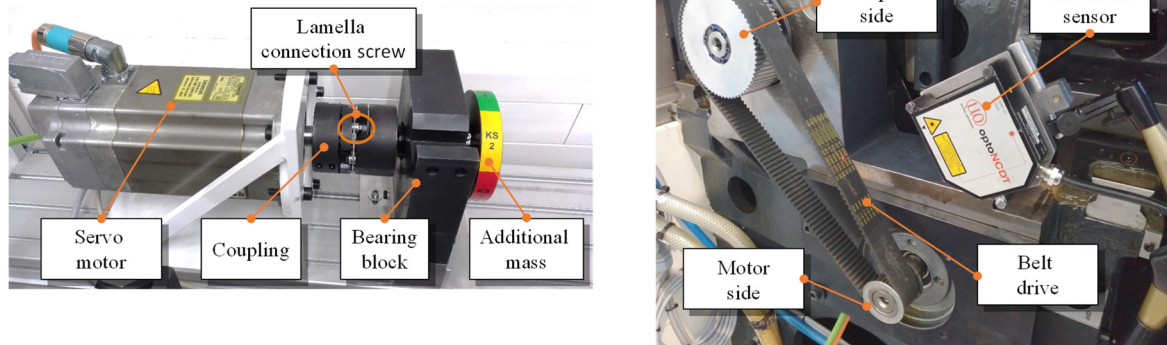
Rotary single-axis test stand (left) and machine tool feed axis with belt drive (right).
